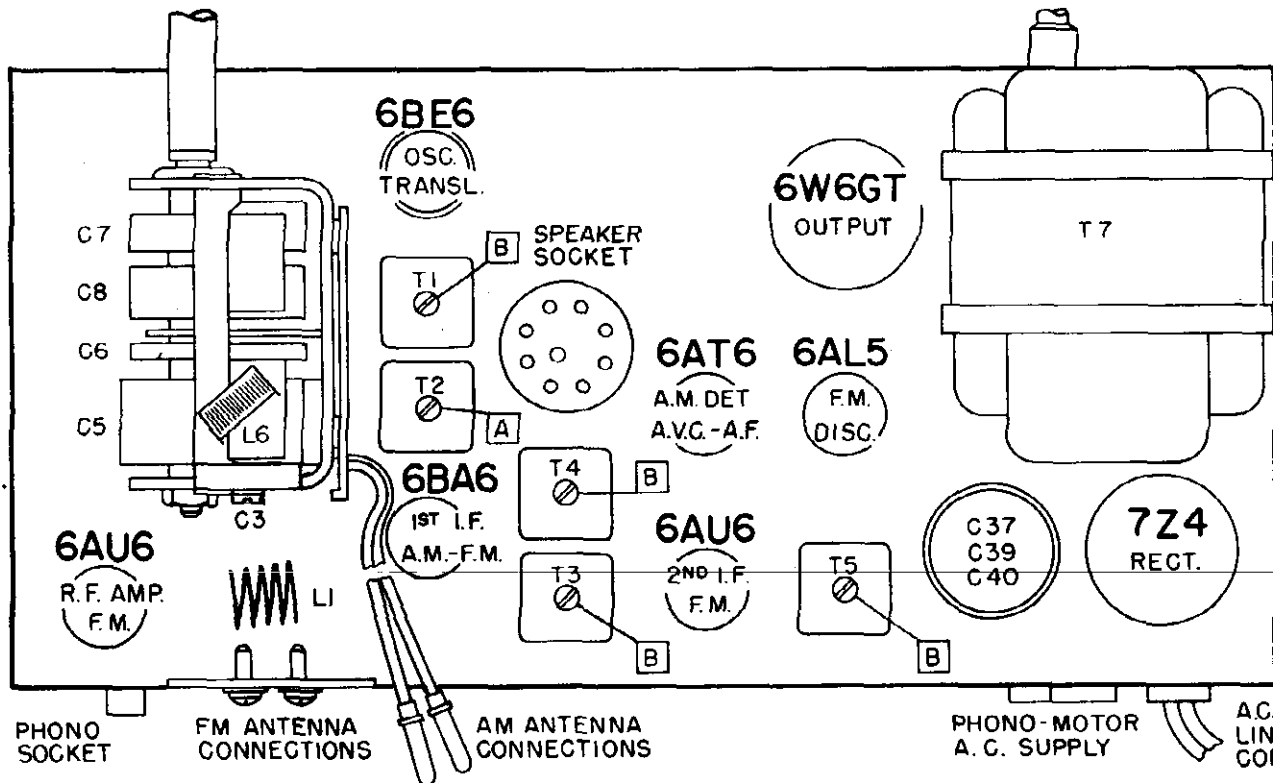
RADIO CHASSIS LAYOUT - TOP VIEW
